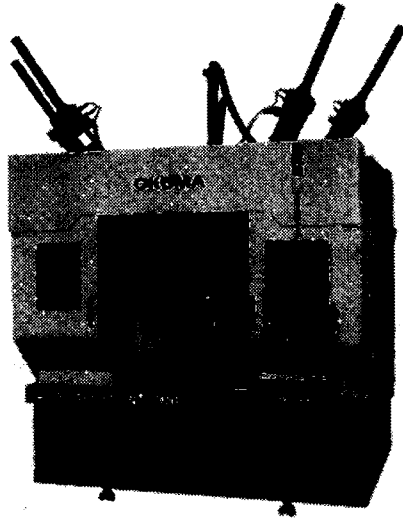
(a) Parallel Mechanism Machining Center (Okuma)
